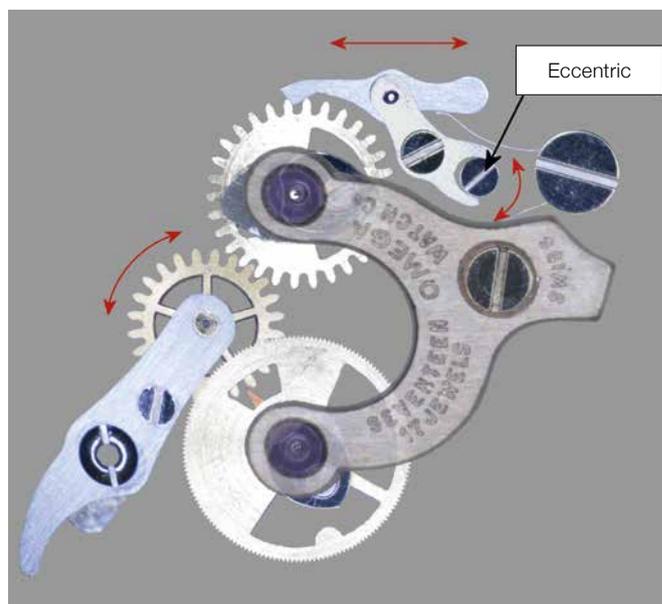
Omega 320/Lemania 2310 minute recorder with adjustable jumper - adjusting position of minute recorder jumper and sliding gear wheel.
